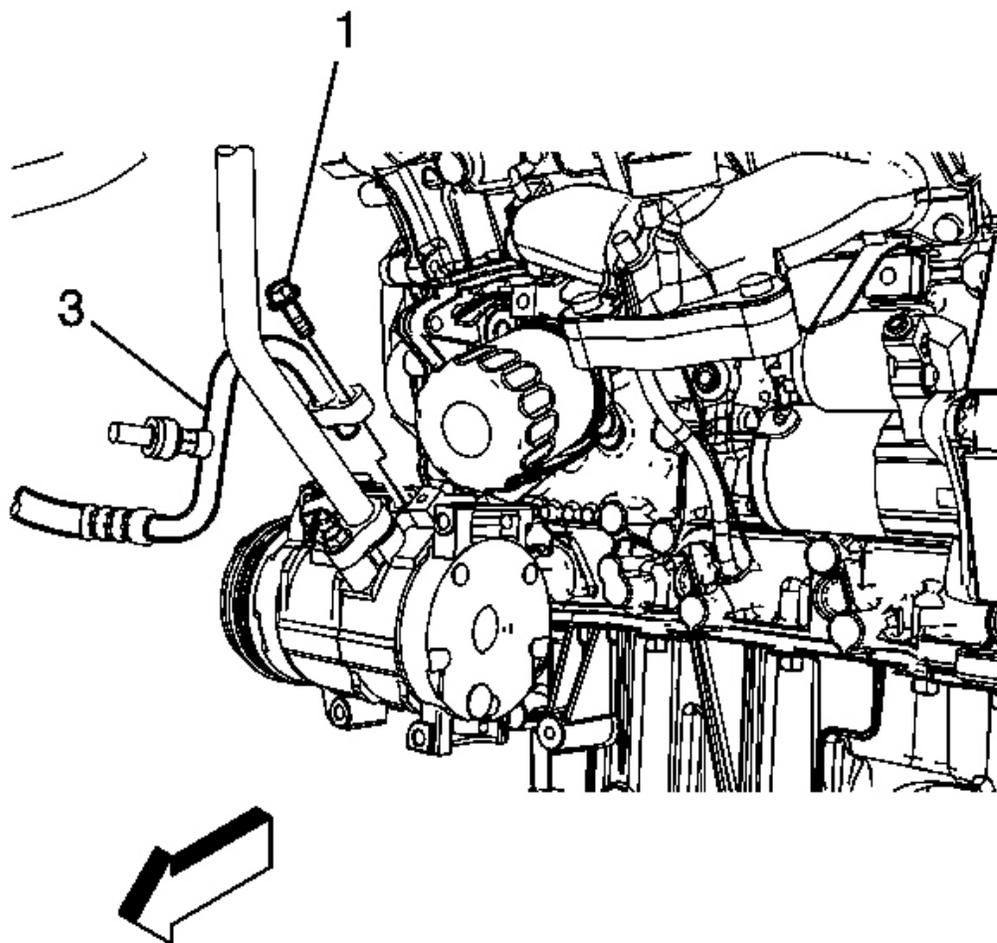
Identifying A/C Compressor Discharge Line & Bolt
